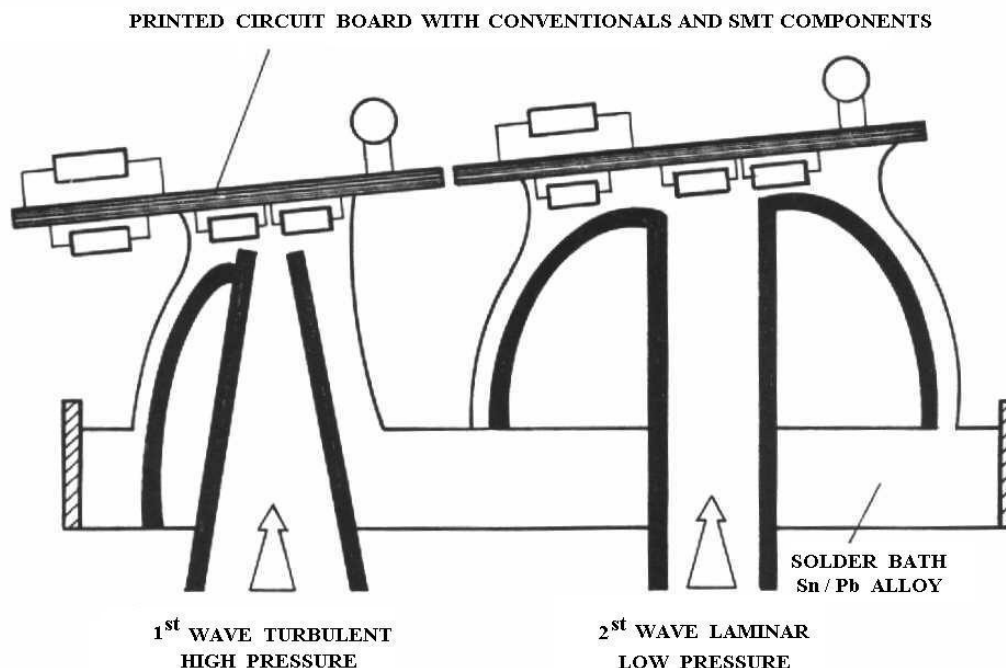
Scheme of the soldering machine by double wave. (VELARDEZ; GRIGOLETTO, 1990).
